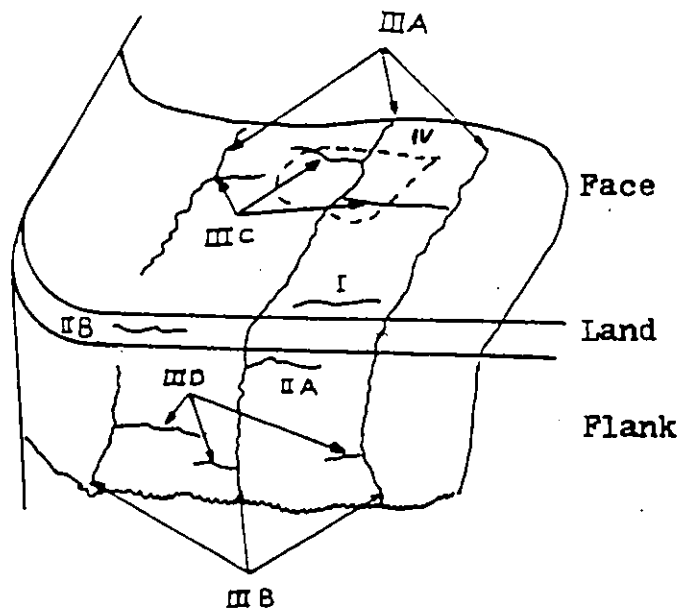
Typical locations and appearances of various types of fatigue cracks.
